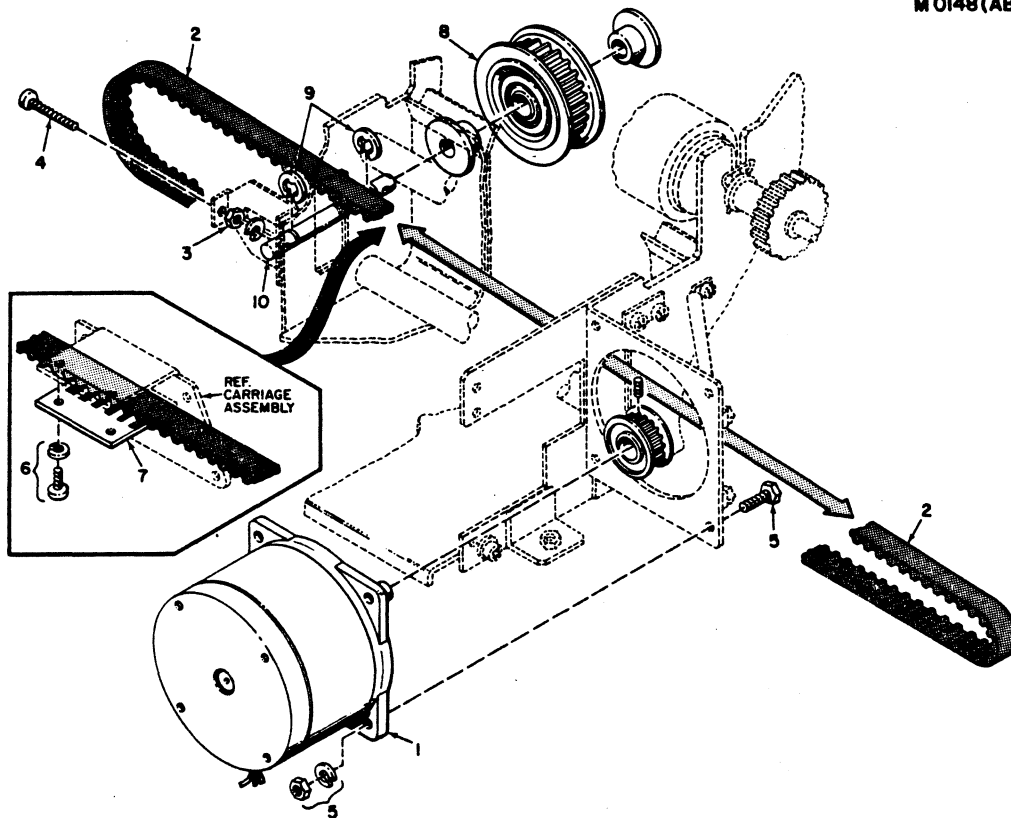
REMOVAL/REPLACEMENT, CARRIAGE ASSEMBLY
